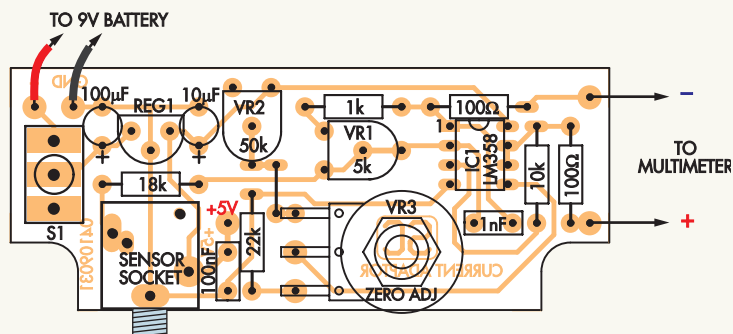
install the parts on the PC board as shown here. The Zero Adjust pot (VR3) is installed by soldering its terminals to three PC stakes.
